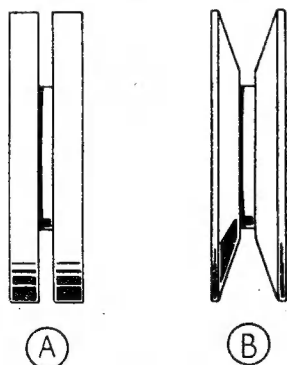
"A"—the pulley groove machined to the full depth with the parting tool; "B"—the groove finished with the V-tool
